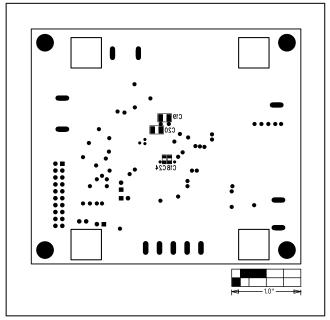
MAX1645B EV Kit Component Placement Guide—Solder Side
